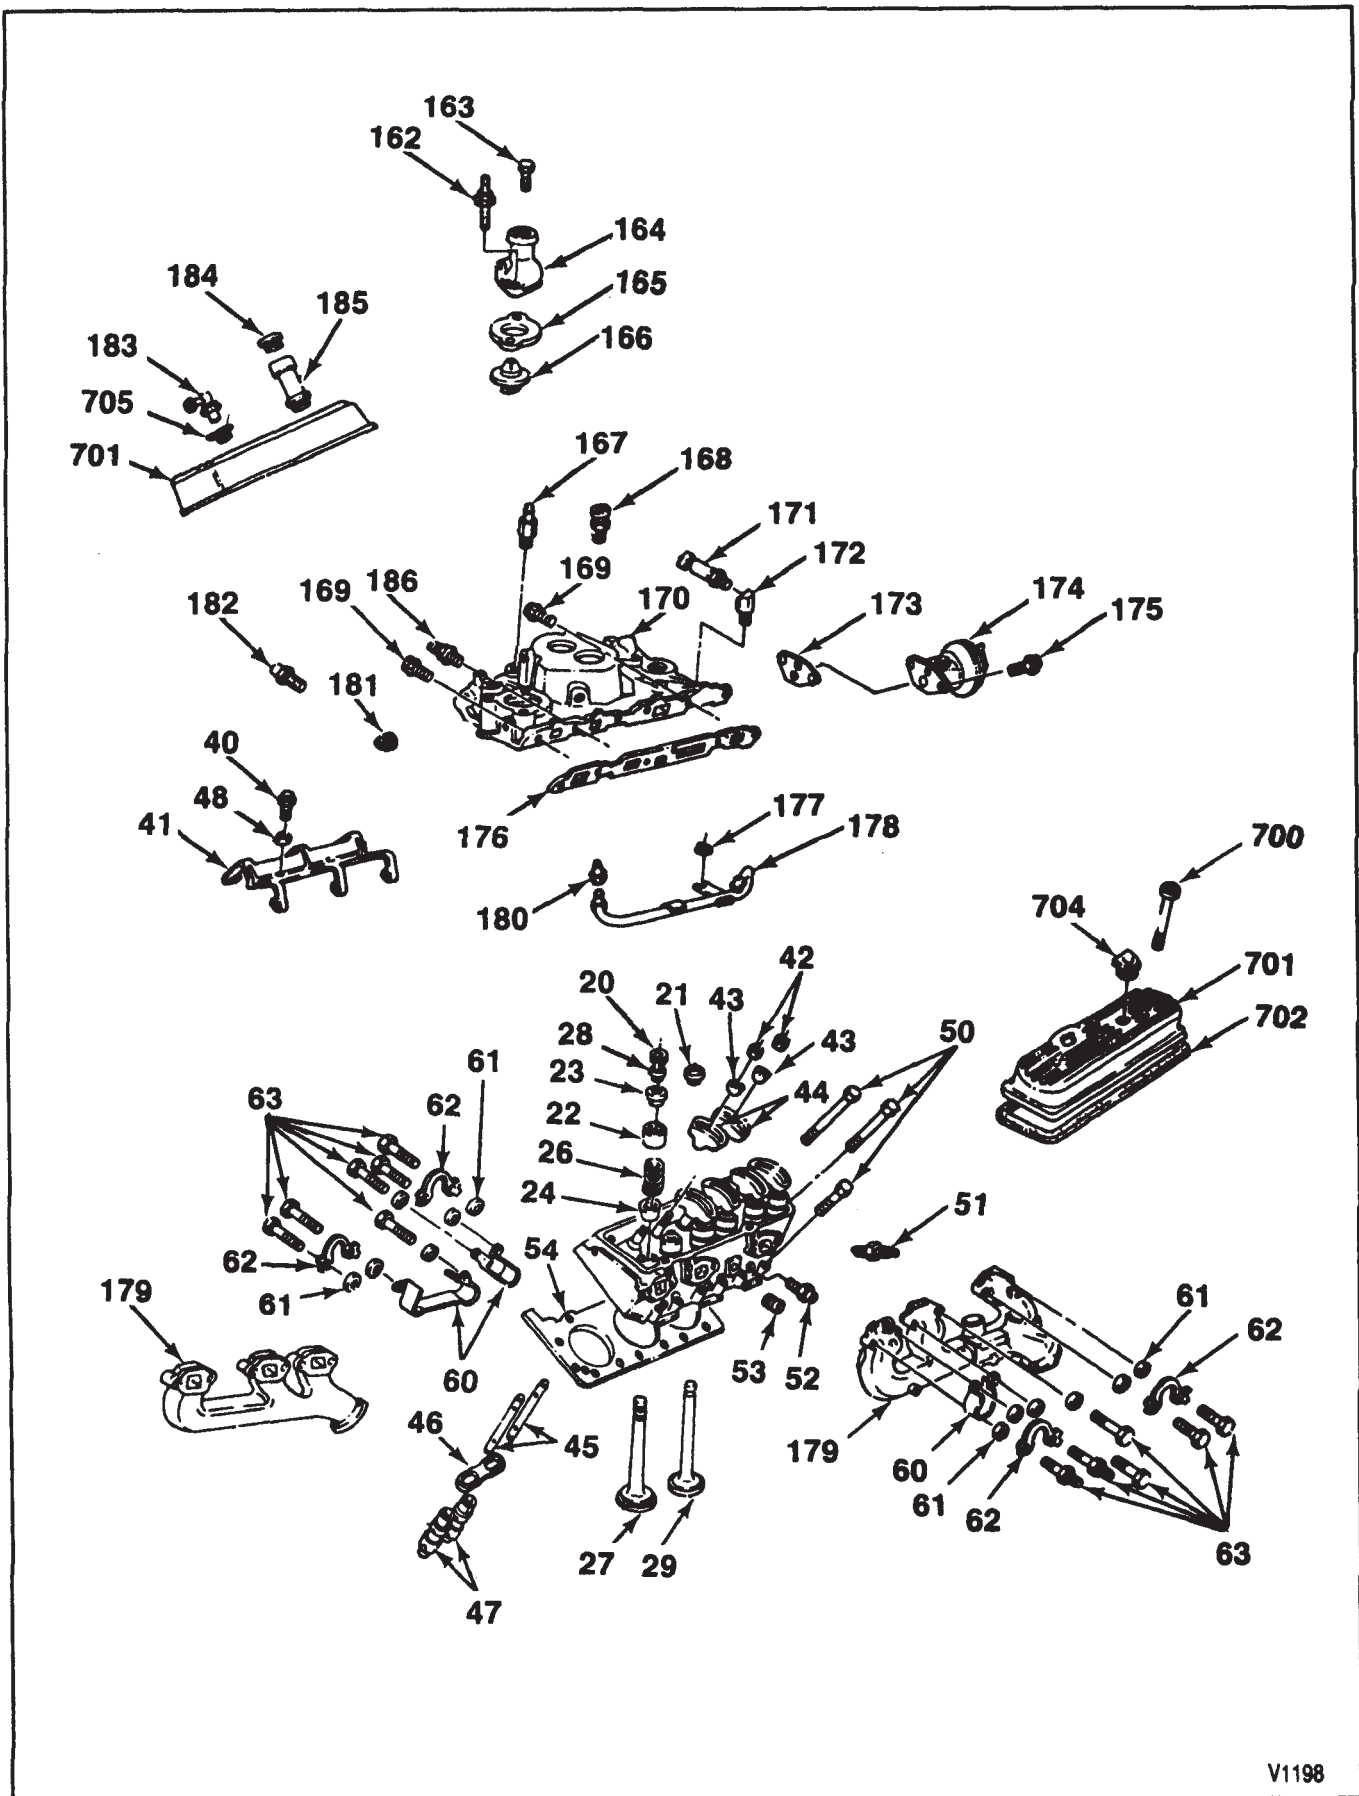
Cylinder Head, Manifolds, and Components (VIN Z Engine)
